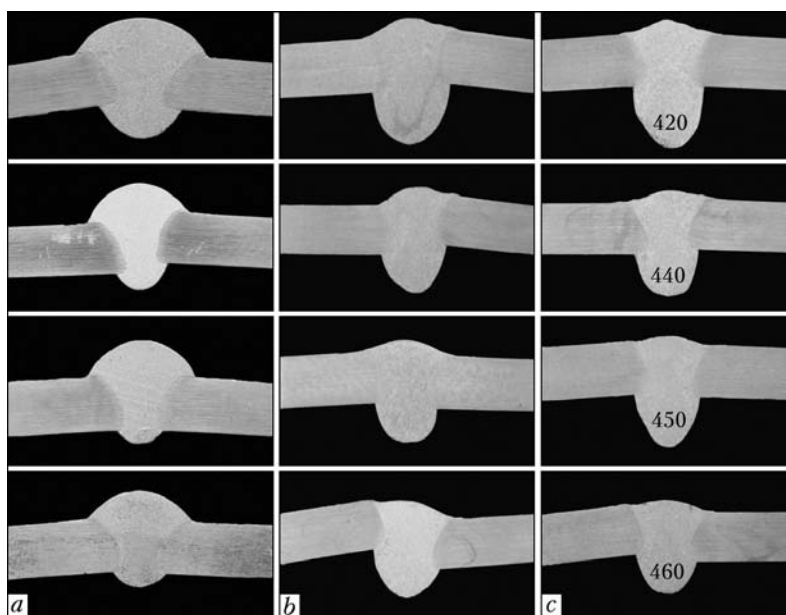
Weld formation, depending on the modes of welding 1915T alloy with 1.2 mm wire with v_w modulation in joints without a gap (a) and with 0.5 (b) and 1 (c) mm gap
